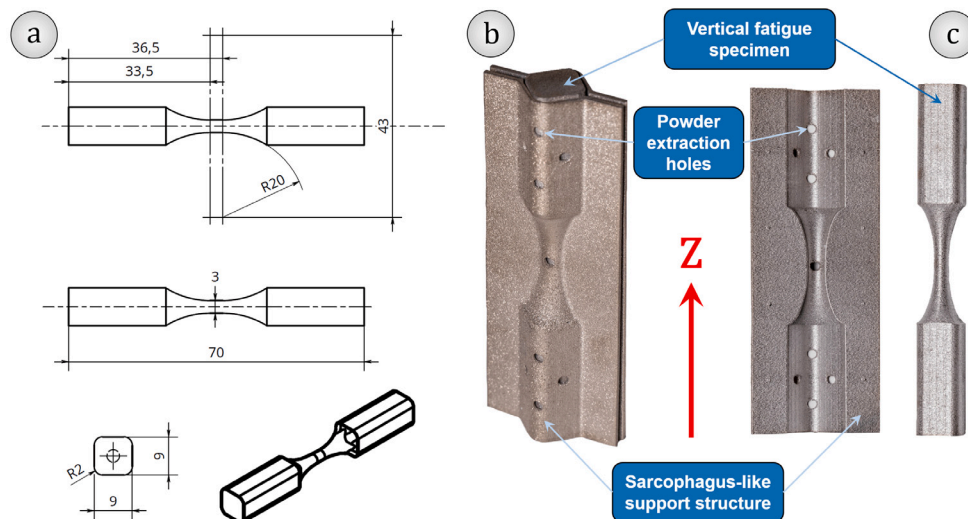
Schematic dimensions of cylindrical fatigue specimens given in mm (a). Images of a vertically printed fatigue specimen inside (b) and outside (c) its sarcophagus-like support structure after cutting from the build plates.
